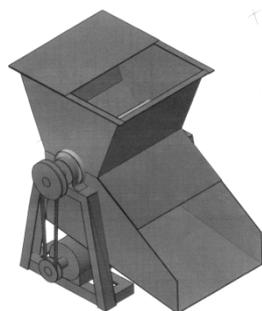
The Designed Akpu (Cassava) Milling Machine in Solid Drawing
